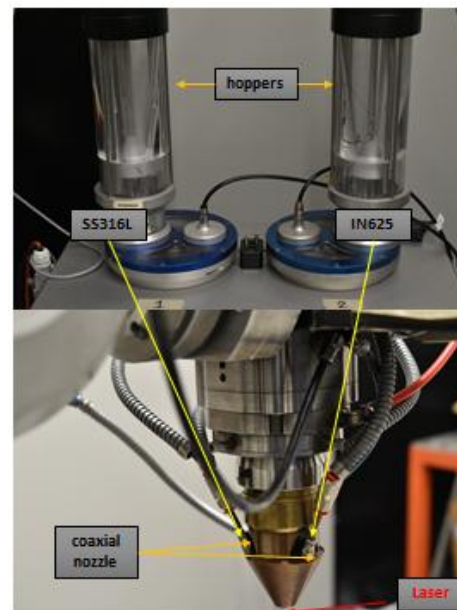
Dual-Hopper LDED Setup with Coaxial Nozzle and IPG YLS-3000 Laser Head
